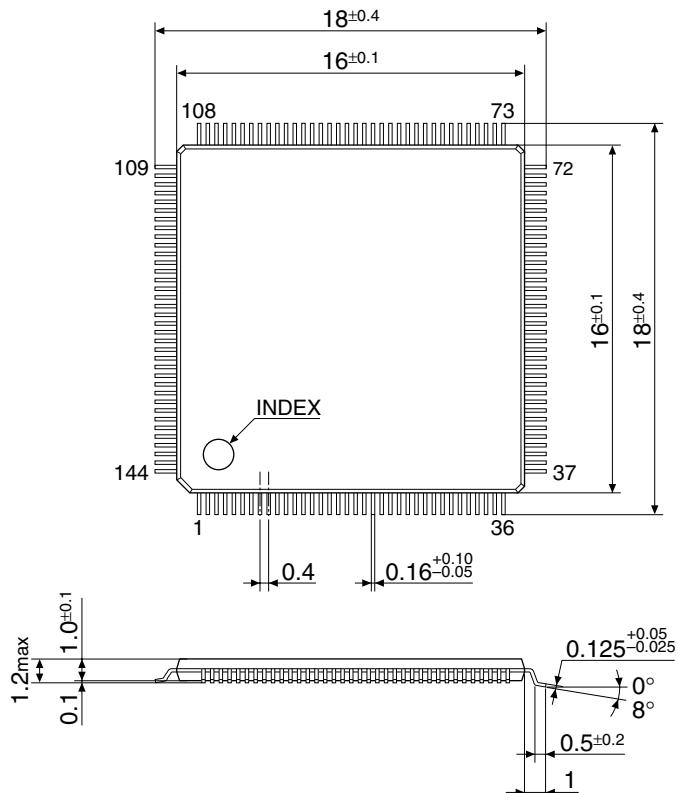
TQFP24-144pin Package Dimensions
